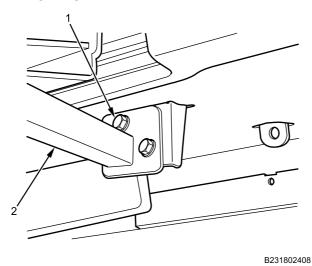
Right Side Gunner Platform Stand Mounting Bolts.
